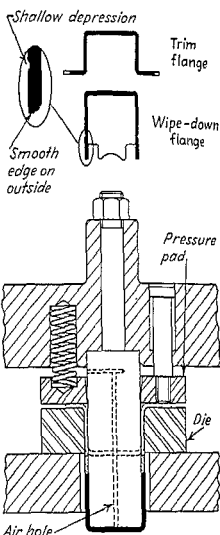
Draw-and-pinch-trim die. (Acklin Stamping Co.)
